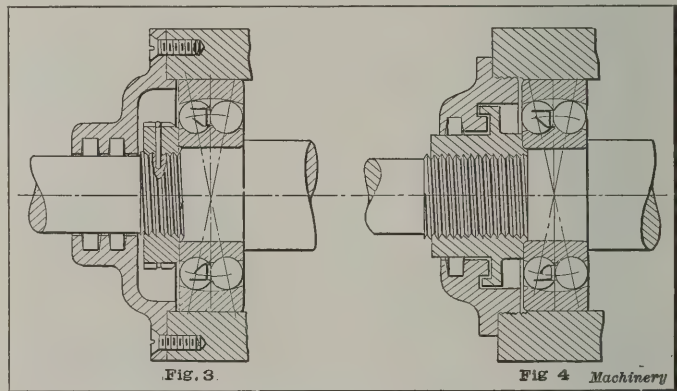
Cap with Two Grooves. Fig. 4. Cap Design used where Bearing is exposed to Fine Dust
